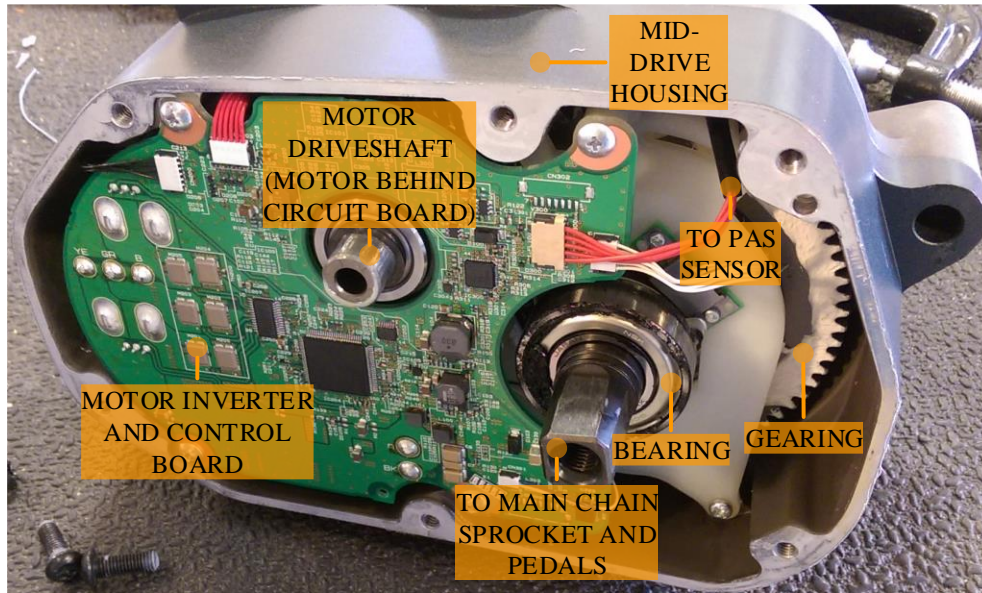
Shimano STEPS mid-drive setup - disassembled
